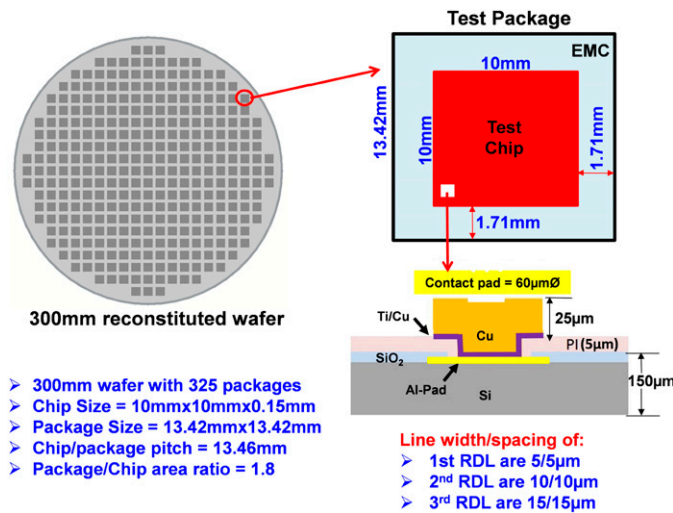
Test package dimensions and test packages on reconstituted wafer.
